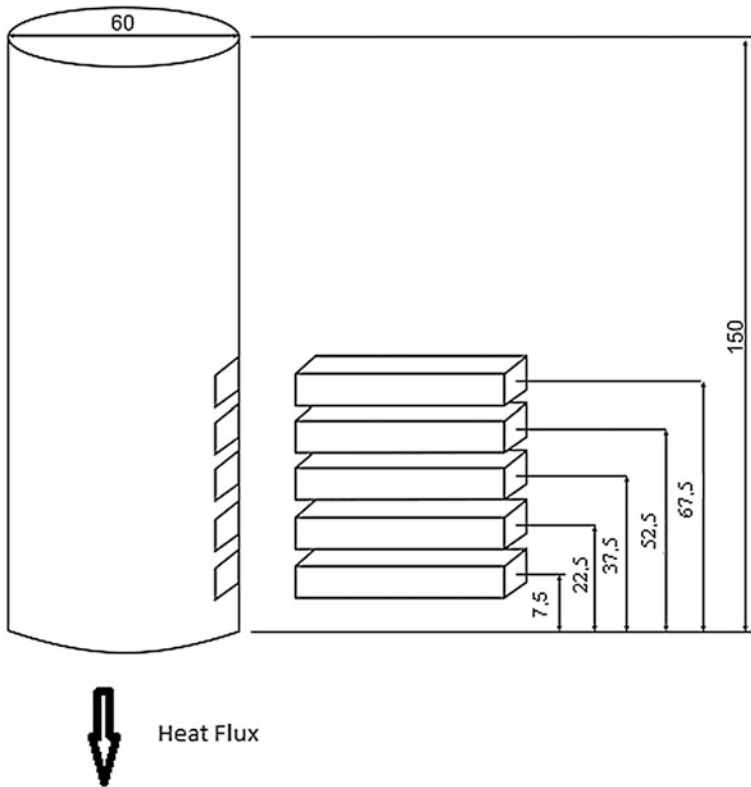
Removal of specimens for tensile tests (dimensions in mm)
